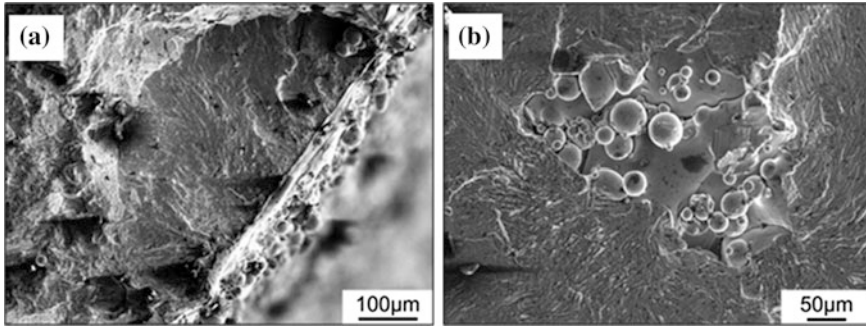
Fatigue crack initiation: from surface (a); from internal material defect (b) [10]
